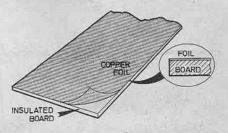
Printed circuit board consists of a copper foil bonded to an insulating material.
